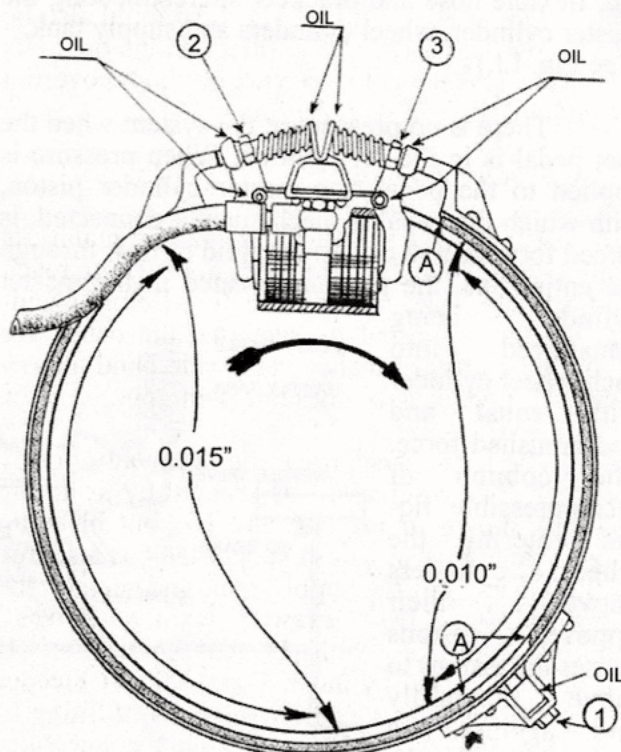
LINING CLEARANCES ON EXTERNAL TYPE BRAKES
